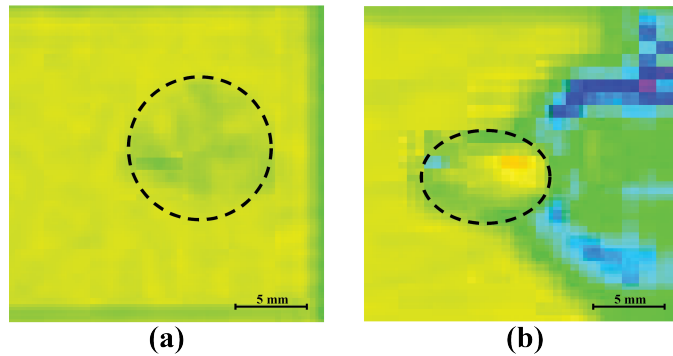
Comparison of damaged area of spot welded (a) and mechanically fastened (b) joints after DLS tests. The black dashed lines indicate the welded area (a) and deformed fastener hole (b) after DLS tests, respectively.
